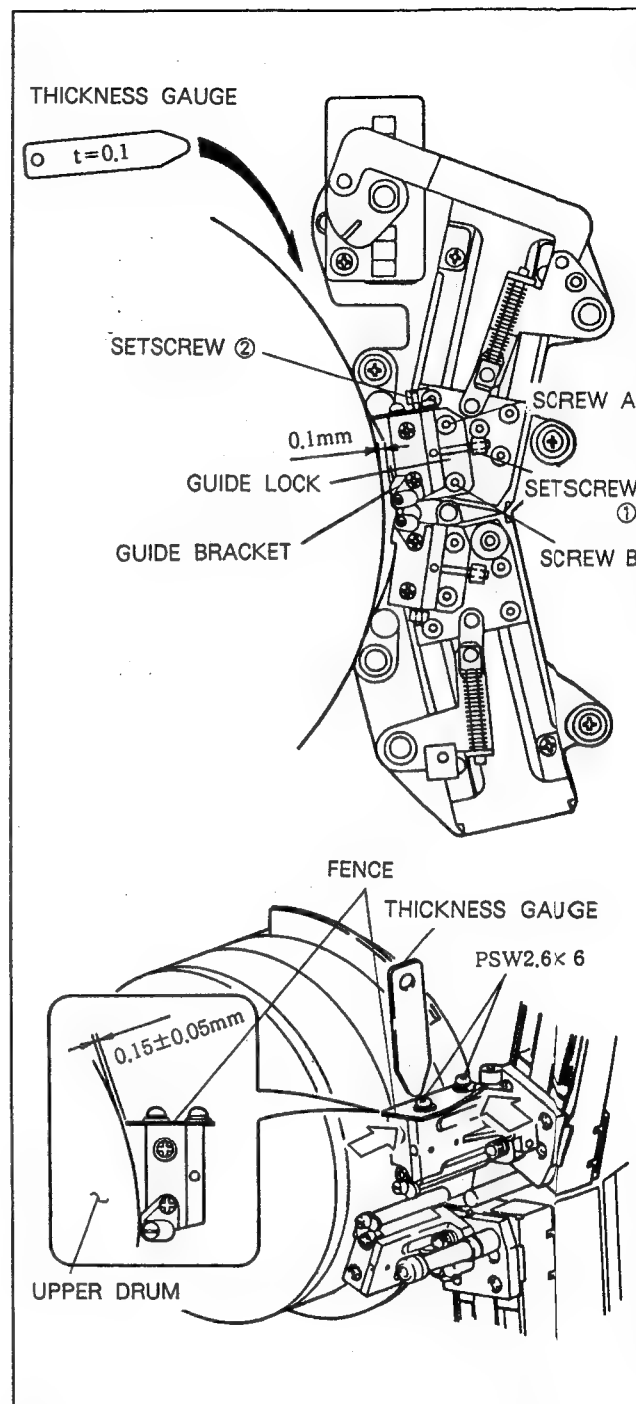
Adjustment of Mounting Position of Entrance Slant Guide Assembly
